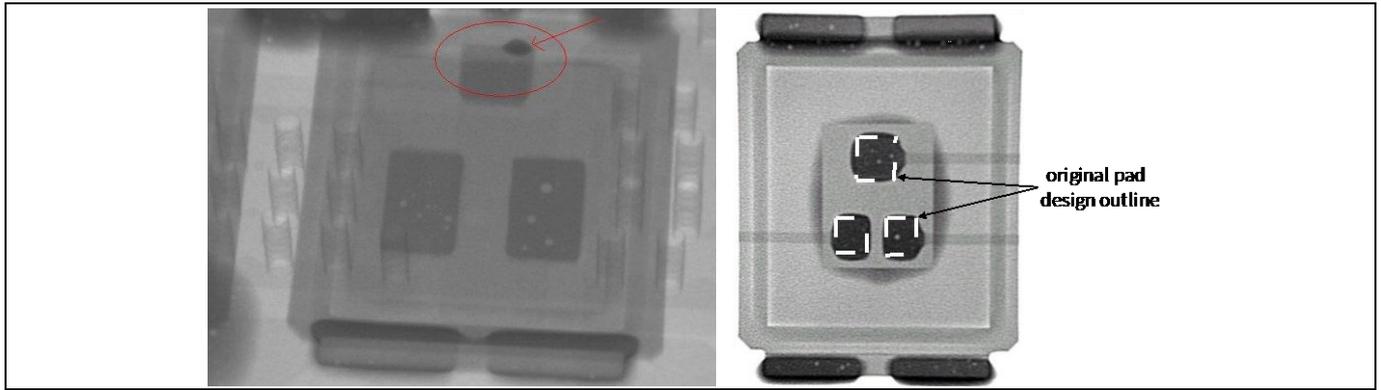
Over-sized gate pad on PCB (left) and absence of a solder mask to define pads (right)
